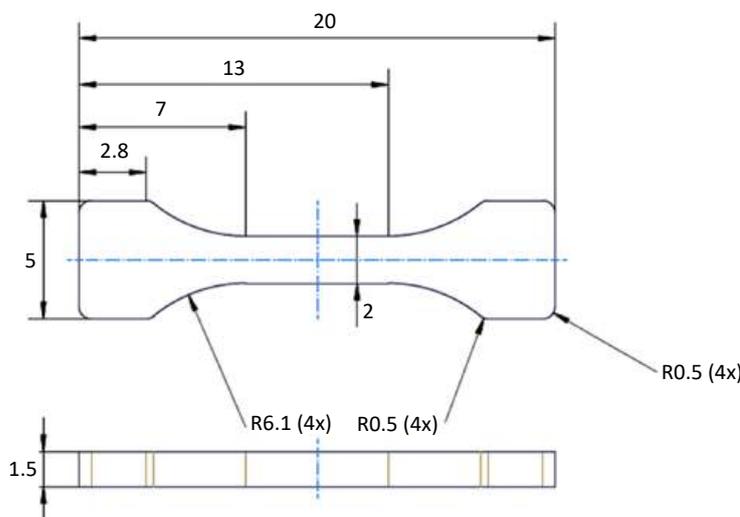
A drawing of the miniaturised tensile specimen used as a demonstrator part [4]
